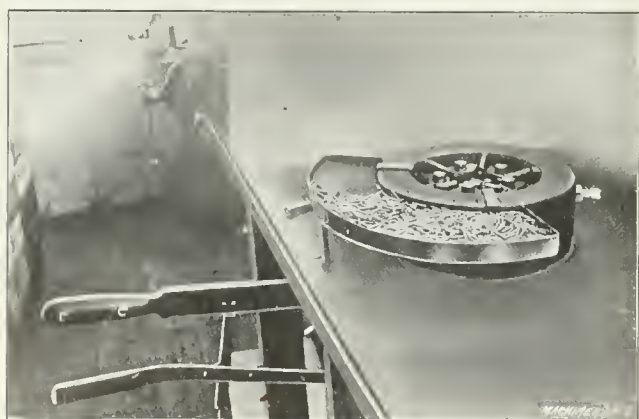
Machine for Swaging Pentagon on End of Main Shaft
